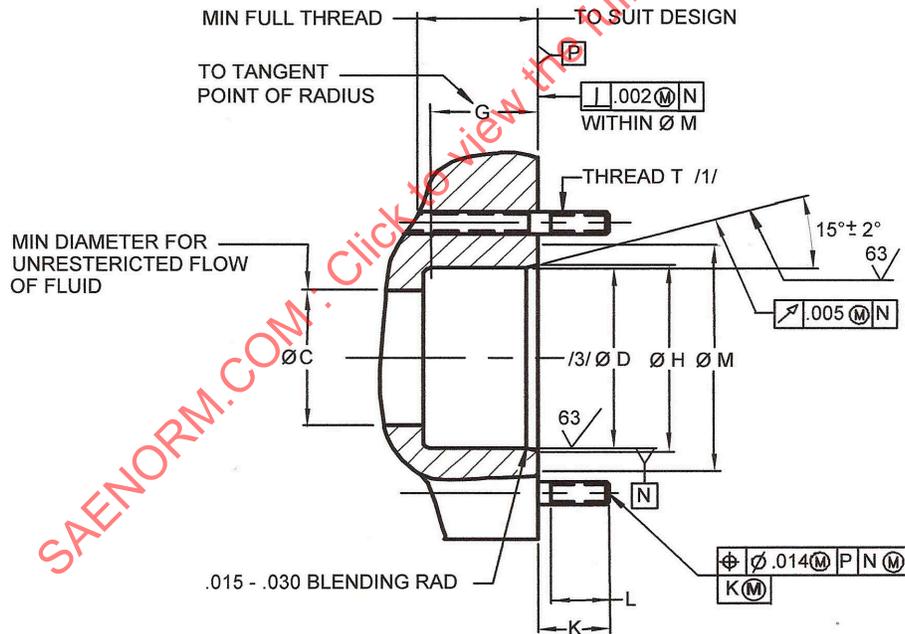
SECTION XX (TYPICAL) THRU STUD INSTALLATION
